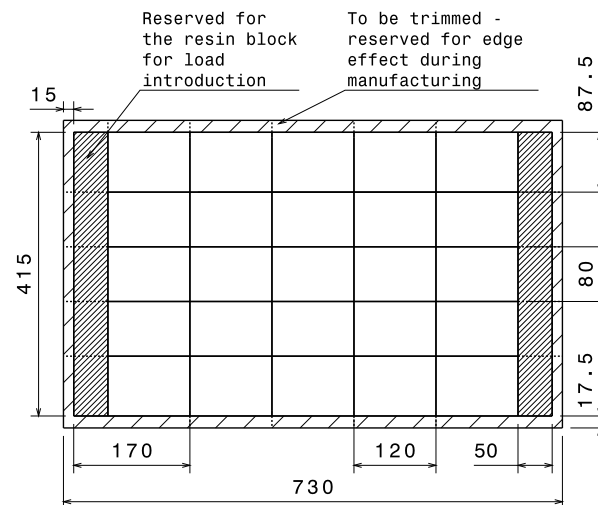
The dimensions [mm] of the manufactured laminates.
